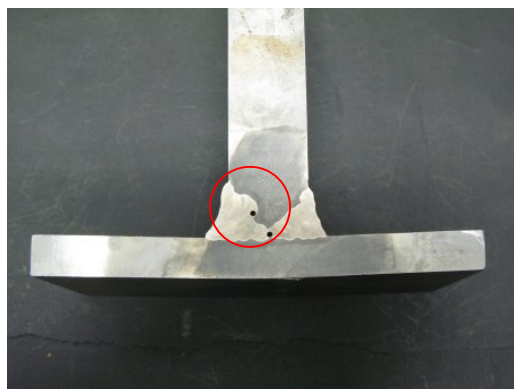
Image of bottom ring to bottom plate weld with repaired zone
